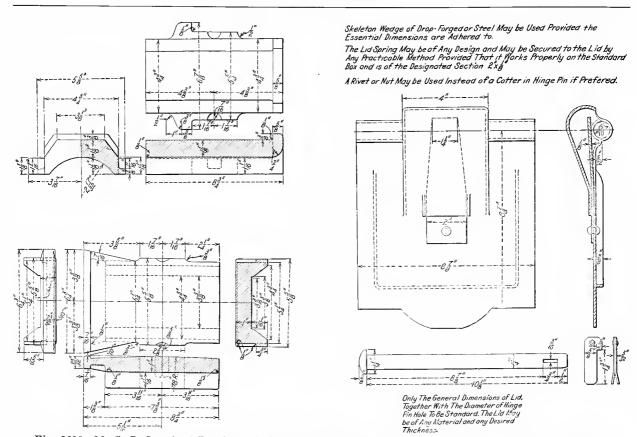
M. C. B. Standard Bearing, Wedge and Journal Box Lid for 5 in. by 9 in. Journal. (M. C. B. Sheet 9.)
